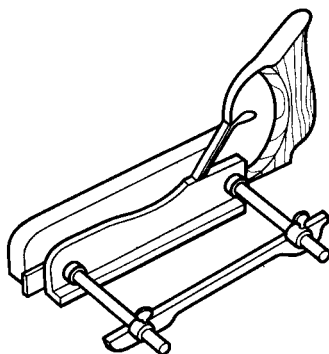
The plough or grooving plane which is used to make grooves.
